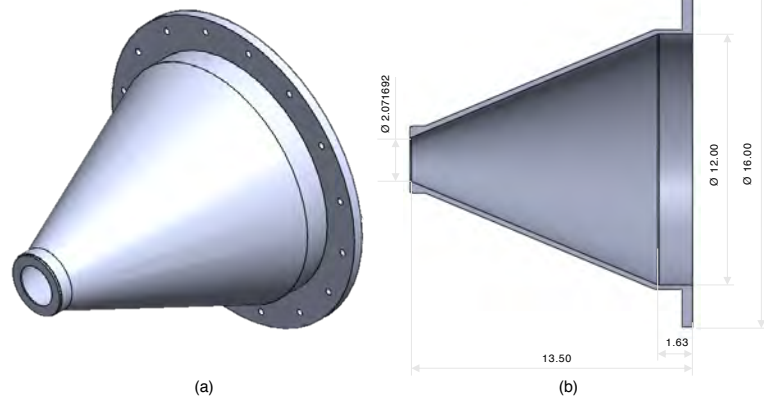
Secondary nozzle (a) isometric view and (b) dimensioned cross section view
